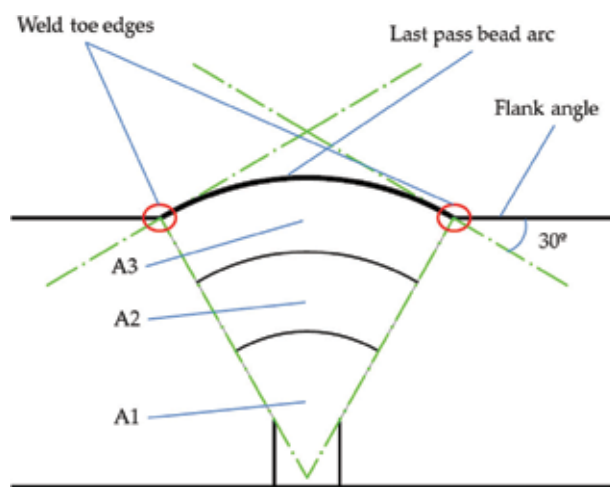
Schematic of the procedure to calculate the weld bead geometry for each pass for a three-pass weld case.
